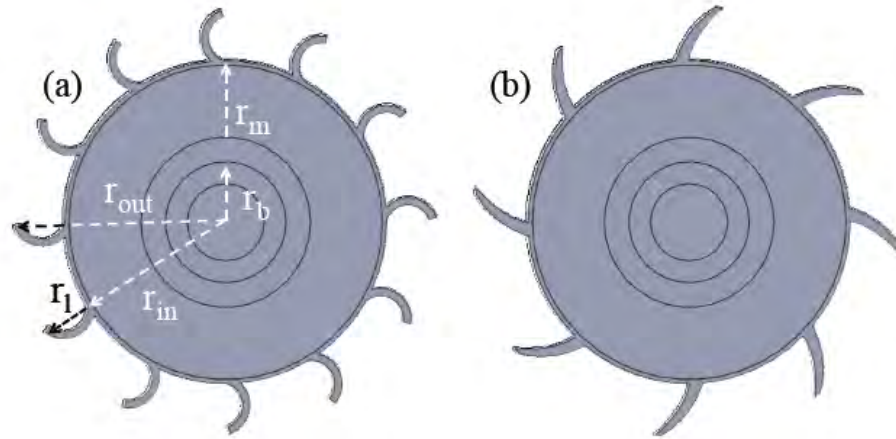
Turbine designs with (a) circular-type blades showing relevant dimensions, and (b) involute-type blades with the same dimensions [26].
